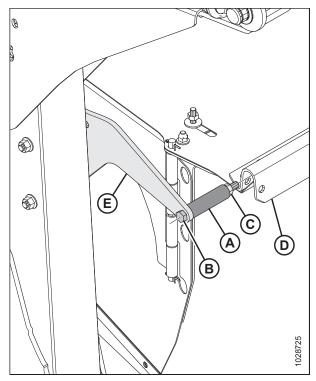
Shield Mount Plate and Attaching Hardware – Right Side Shown, Left Side Is Opposite
